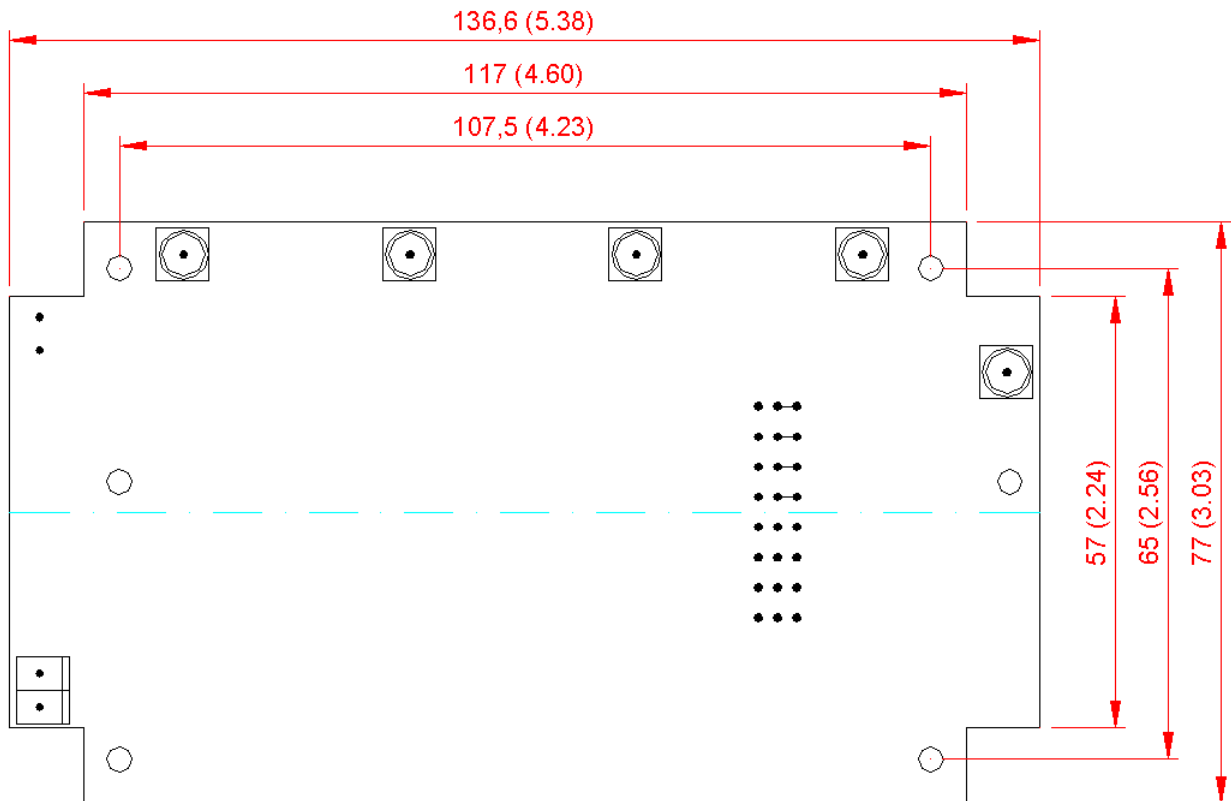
Dimensions and mounting holes (all dimensions in mm (inch))
